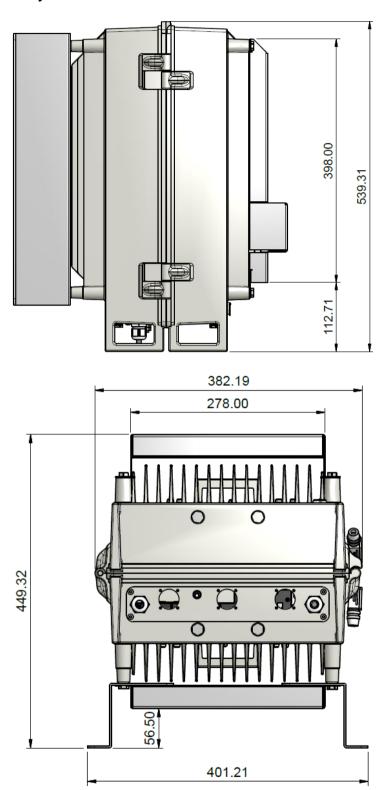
MBF-40 including Fan Hood – Assembly Dimensions
